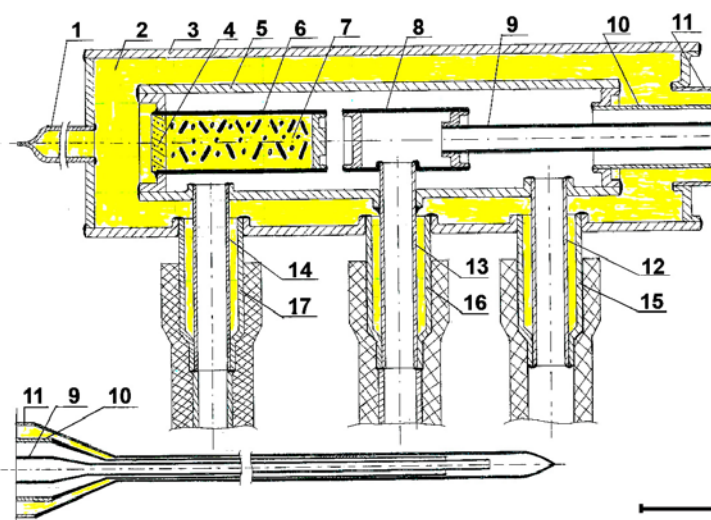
Cryo-thermal probe: 1 – copper tube to vacuumize the probe space; 2 – vacuumizable volume; 3 – casing of the probe; 4 – division plate of porous copper; 5 – inner vessel; 6 – capsule for adsorbent; 7 – adsorbent; 8 – capsule for supplying liquid nitrogen into needle cavity; 9 – inner tube of needle; 10 – intermediate tube of needle; 11 – outer tube of needle; 12 – inlet tube for 'forced' supply of liquid nitrogen into the vessel 5; 13 – inlet tube for supplying liquid nitrogen into the capsule 8; 14 – tube for exit of nitrogen from vessel 5; 15, 16, 17 – nipples connecting tubes 12,13,14 with casing 2. Bar 10 cm.
